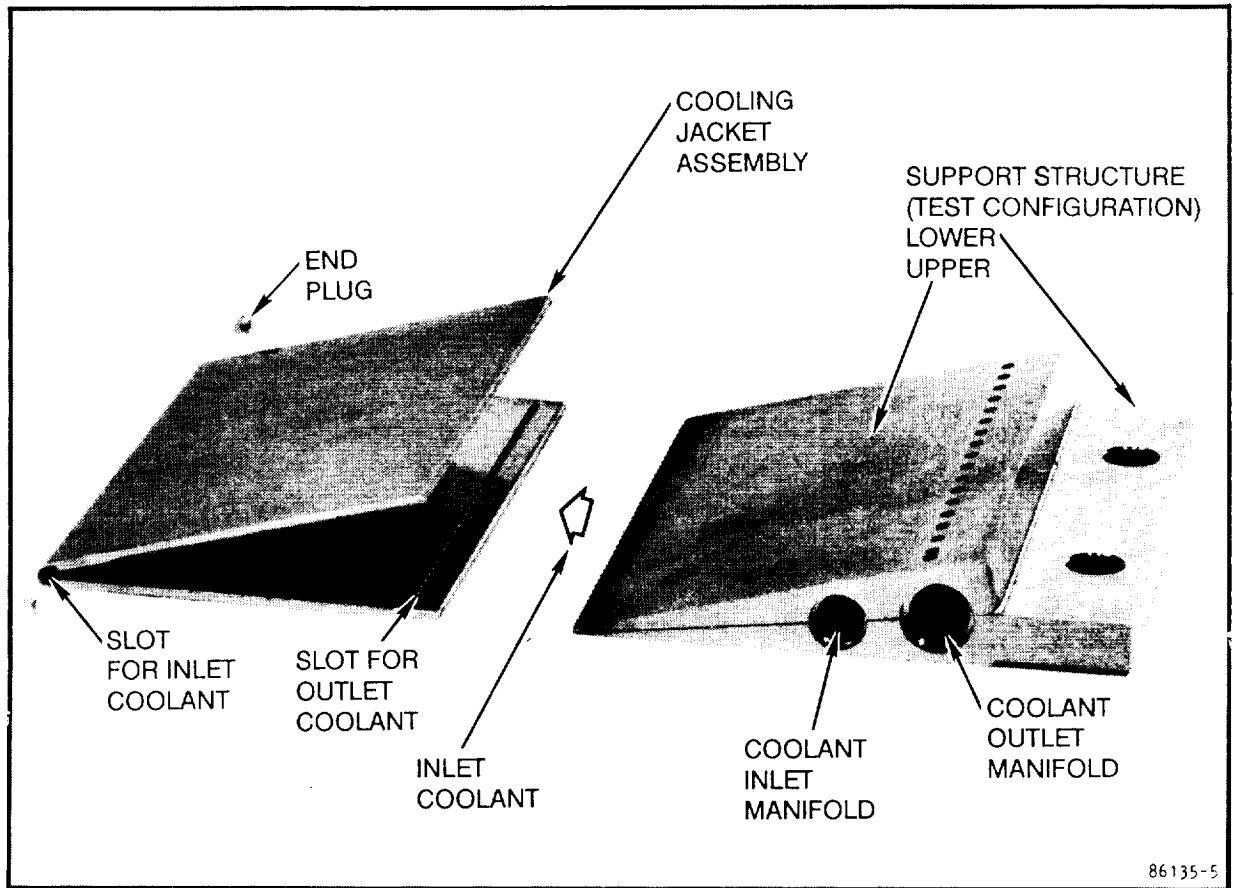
Detail Parts of Strut Leading Edge Test Specimen
